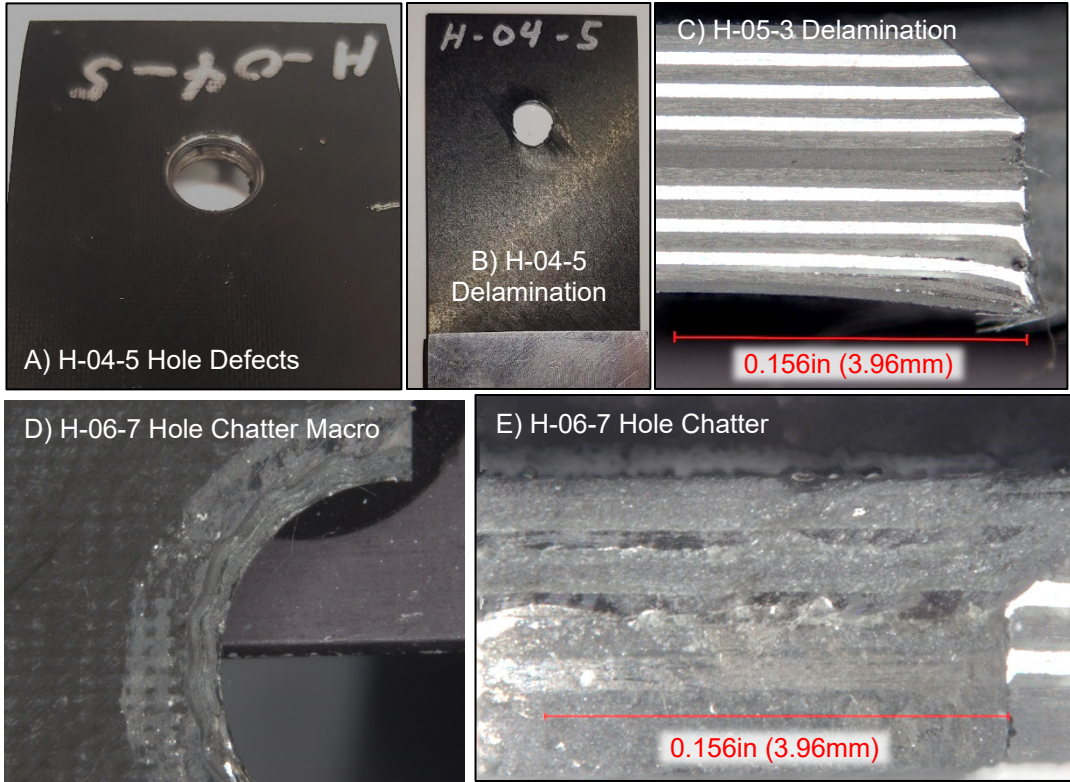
Machining Damage in Hybrid Single Shear Protruding Fatigue Samples
